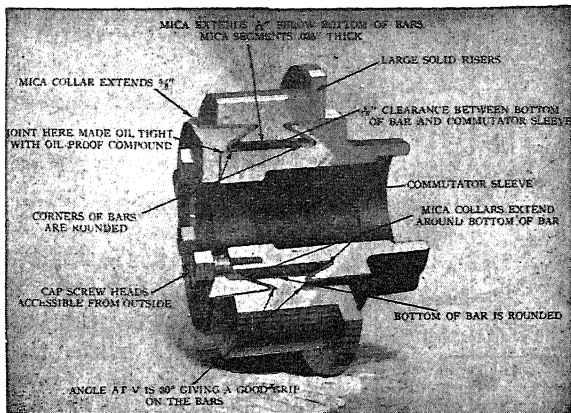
,026.—*Reliance motor construction 26.* Sectional view of commutator.
